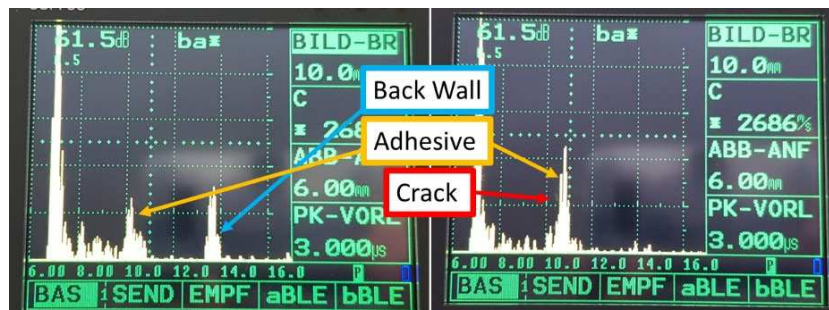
UT-Scans on the WSLs-samples. Left: measurement on bonded area with visible adhesive- and more intensive back wall-echo. Right: measurement on a large crack without back wall-echo due to disbond.
